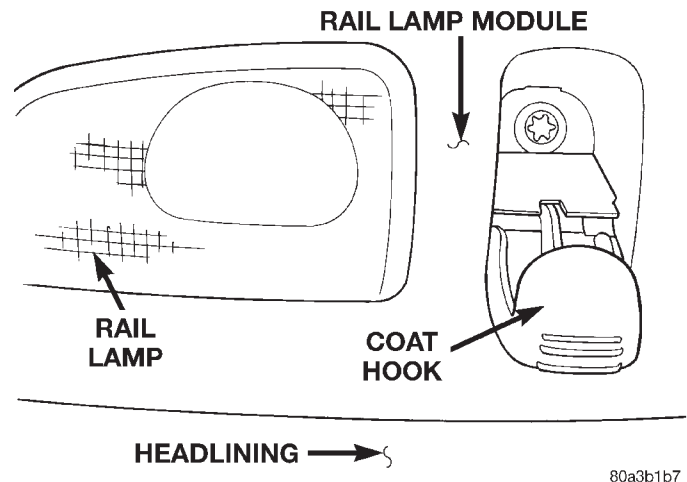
Rail Lamp Module - w/o Rear HVAC
